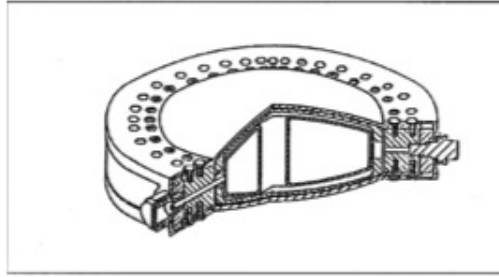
Cross Sectional View of Type V Flextensional Ring-Shell Transducer
